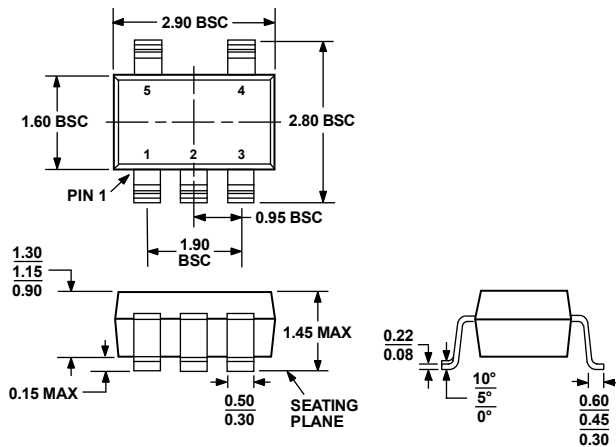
5-Lead Small Outline Transistor Package [SOT-23] (RJ-5)
